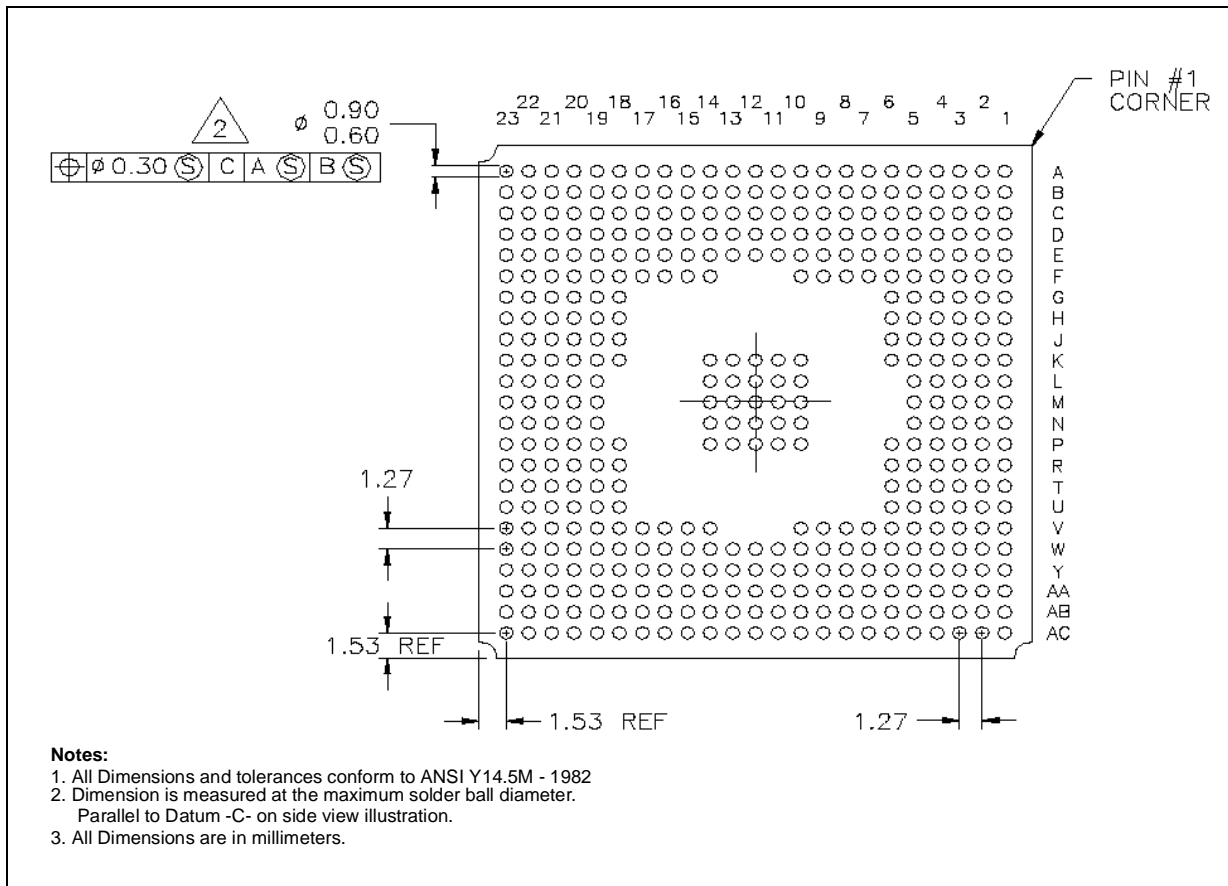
Intel® 82801E C-ICH Package (Bottom View)
